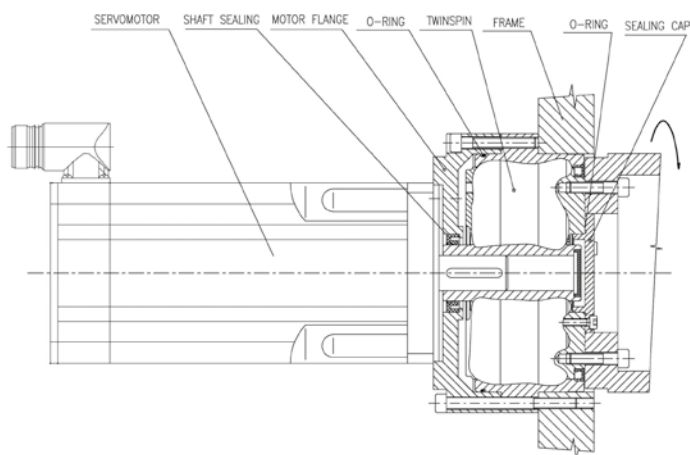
Direct connection of gear shaft with motor
